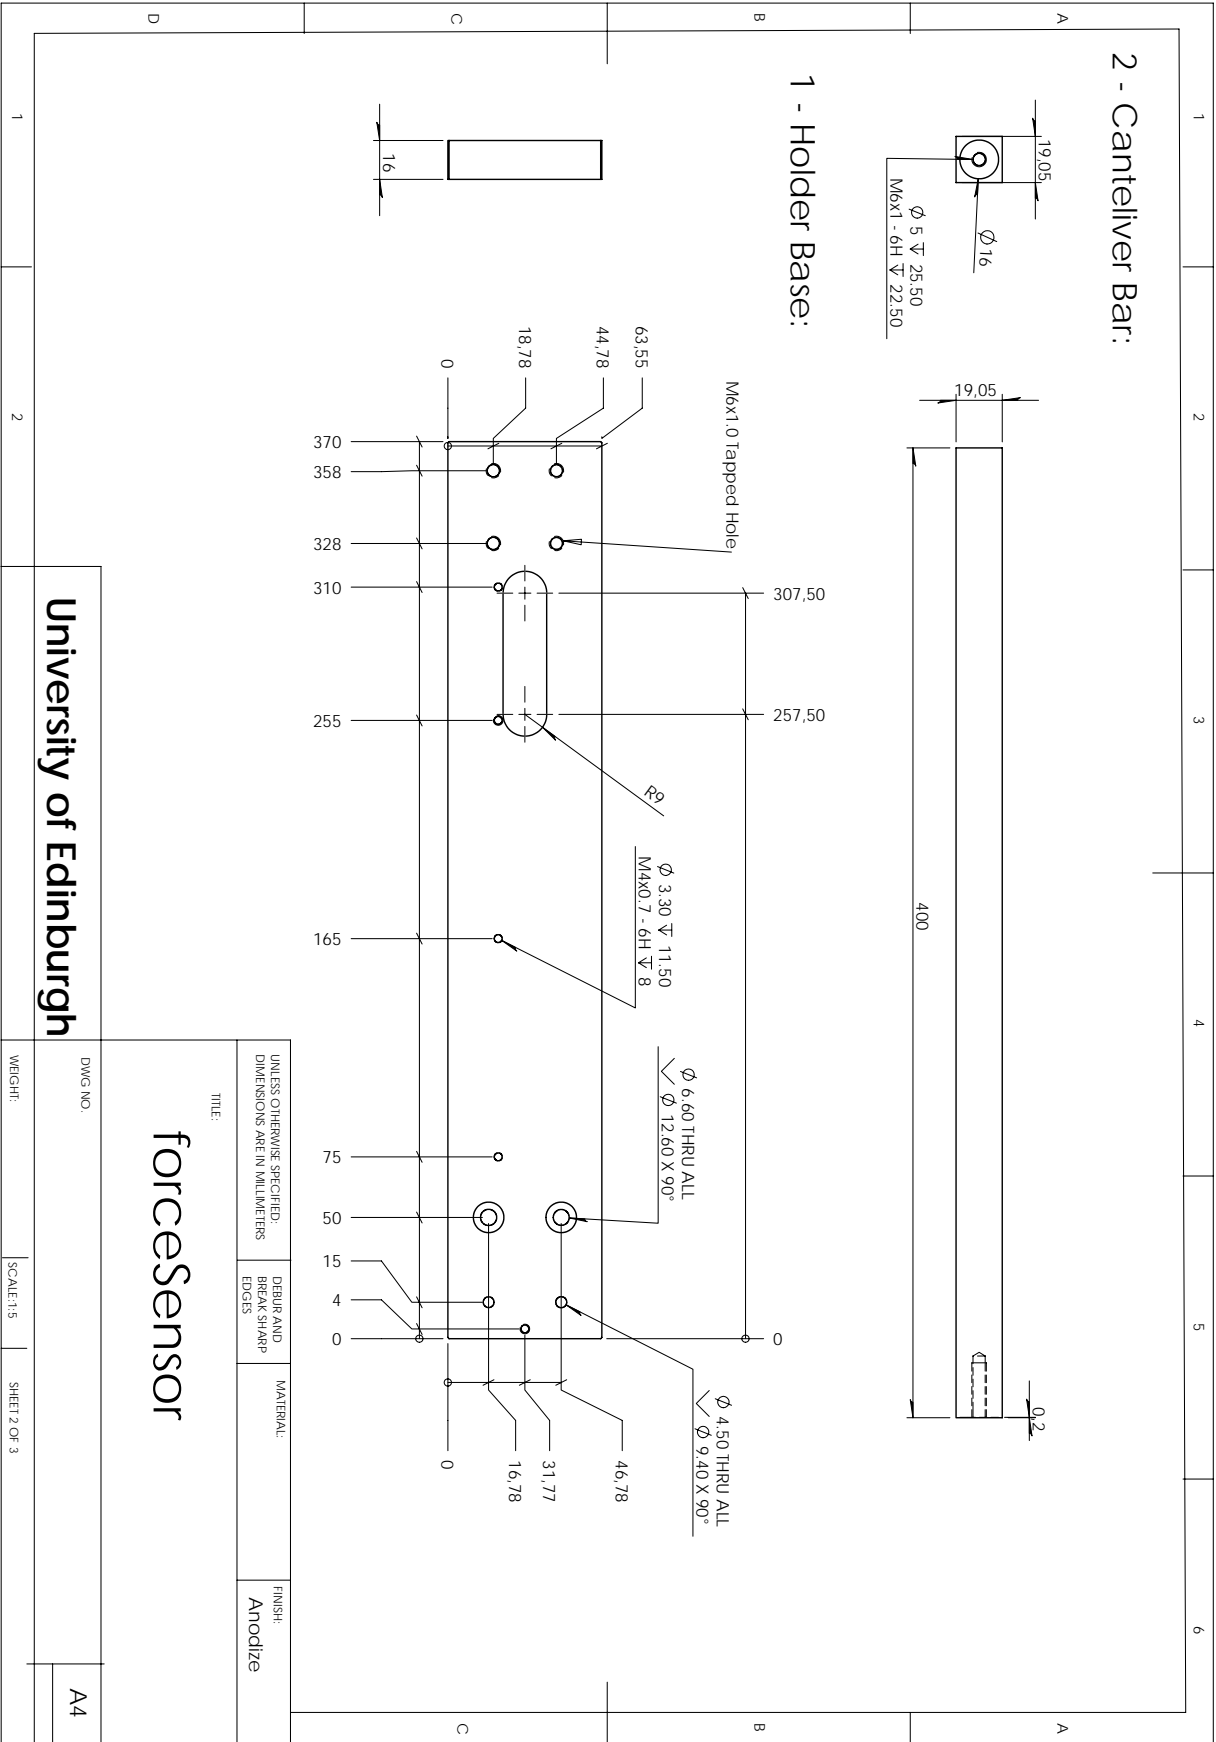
Dimensioning drawing for the holder base and cantilever bar (scale 1:2.5).
